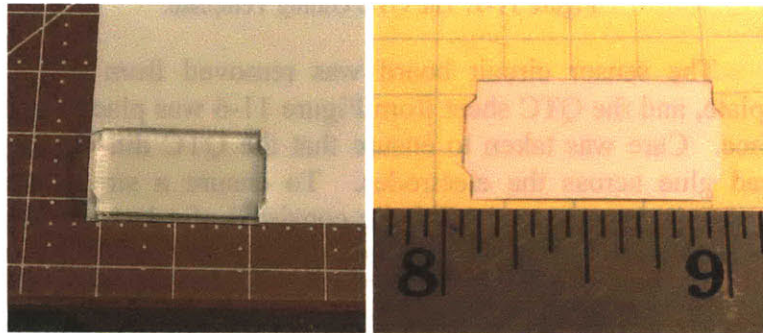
The QTC Sensor Cutting Jig and Cut Sensor. At Left is the acrylic jig. At Right is the finished sensor.
